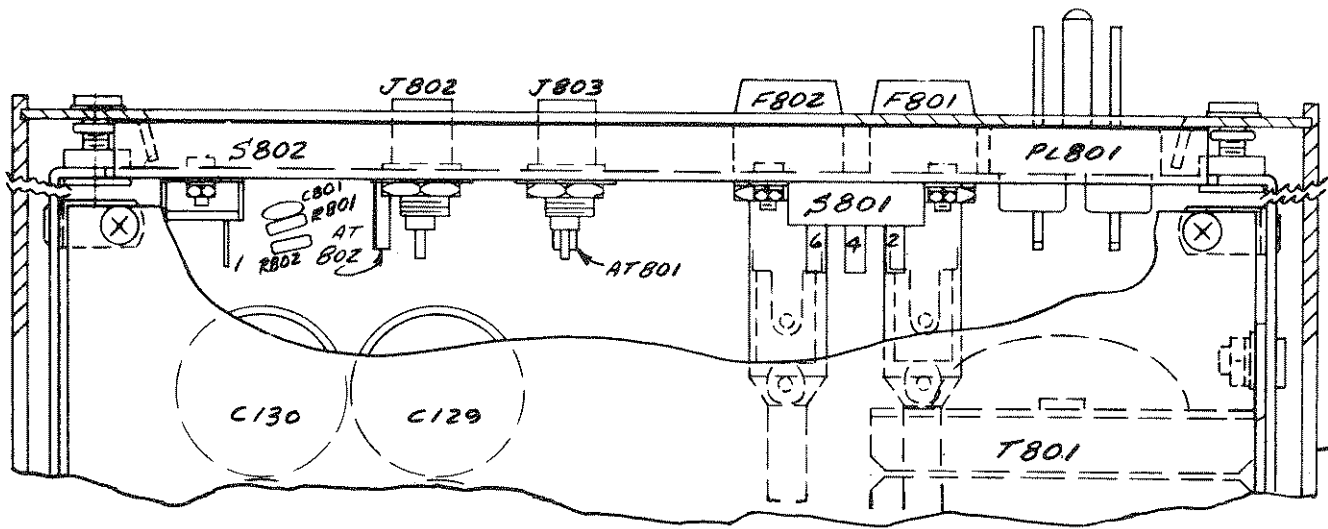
Top view of the rear panel showing the locations of panel components.
